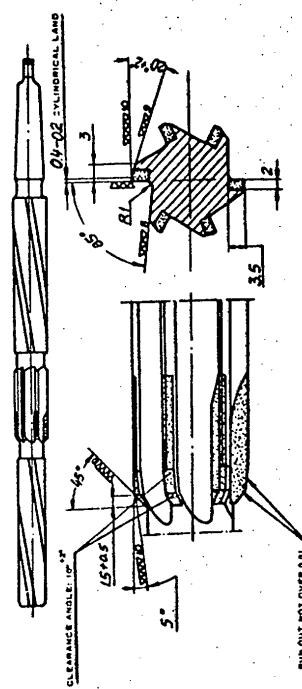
REAMER T-05 1258 FOR EXHAUST VALVE GUIDE
